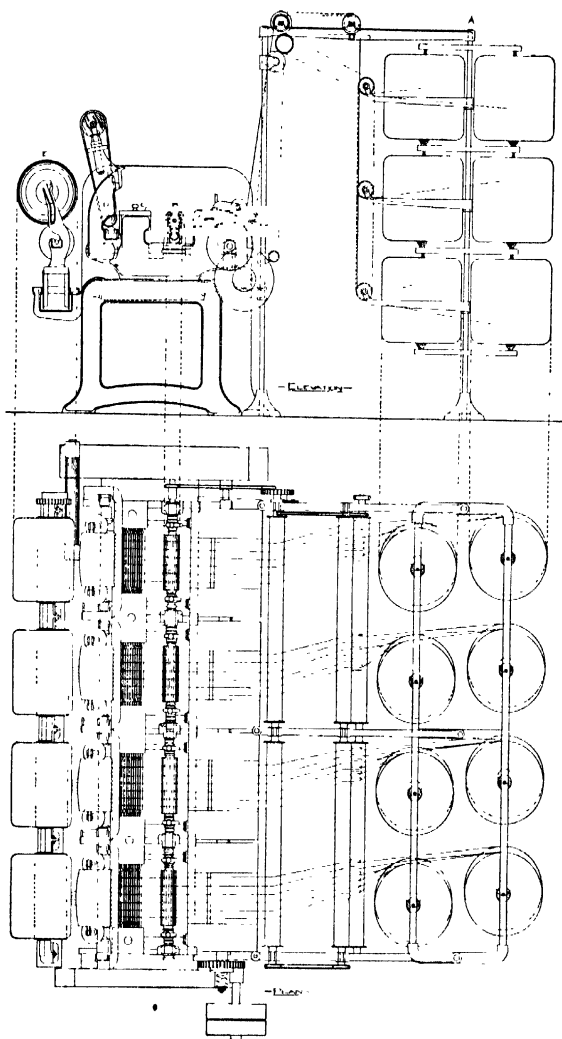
A.—Four-head French Gill-box in Plan and Elevation.
